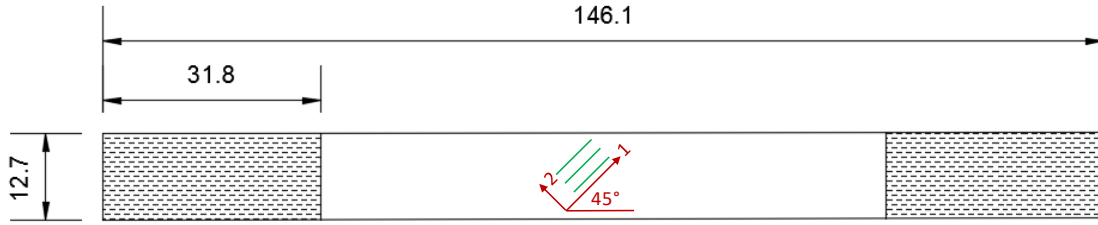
Nominal Specimen Dimensions of Alternative 1-2 Plane Off-axis 45° Tension Test (All Dimensions in mm)
